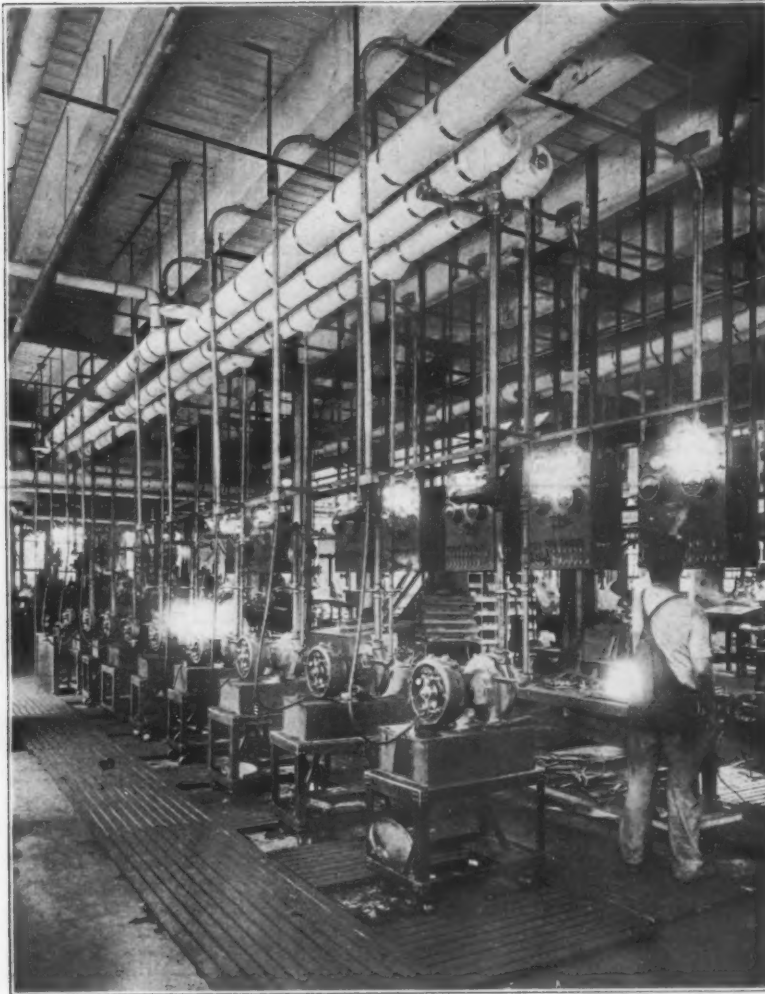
Testing Turbo Generators for Locomotive Headlight and Train Lighting in Plant of Pyle-National Co. The machines are assembled, tested, painted and packed on the steel trucks. Bank of panels is double. Main steam line carries 225 lb. pressure
